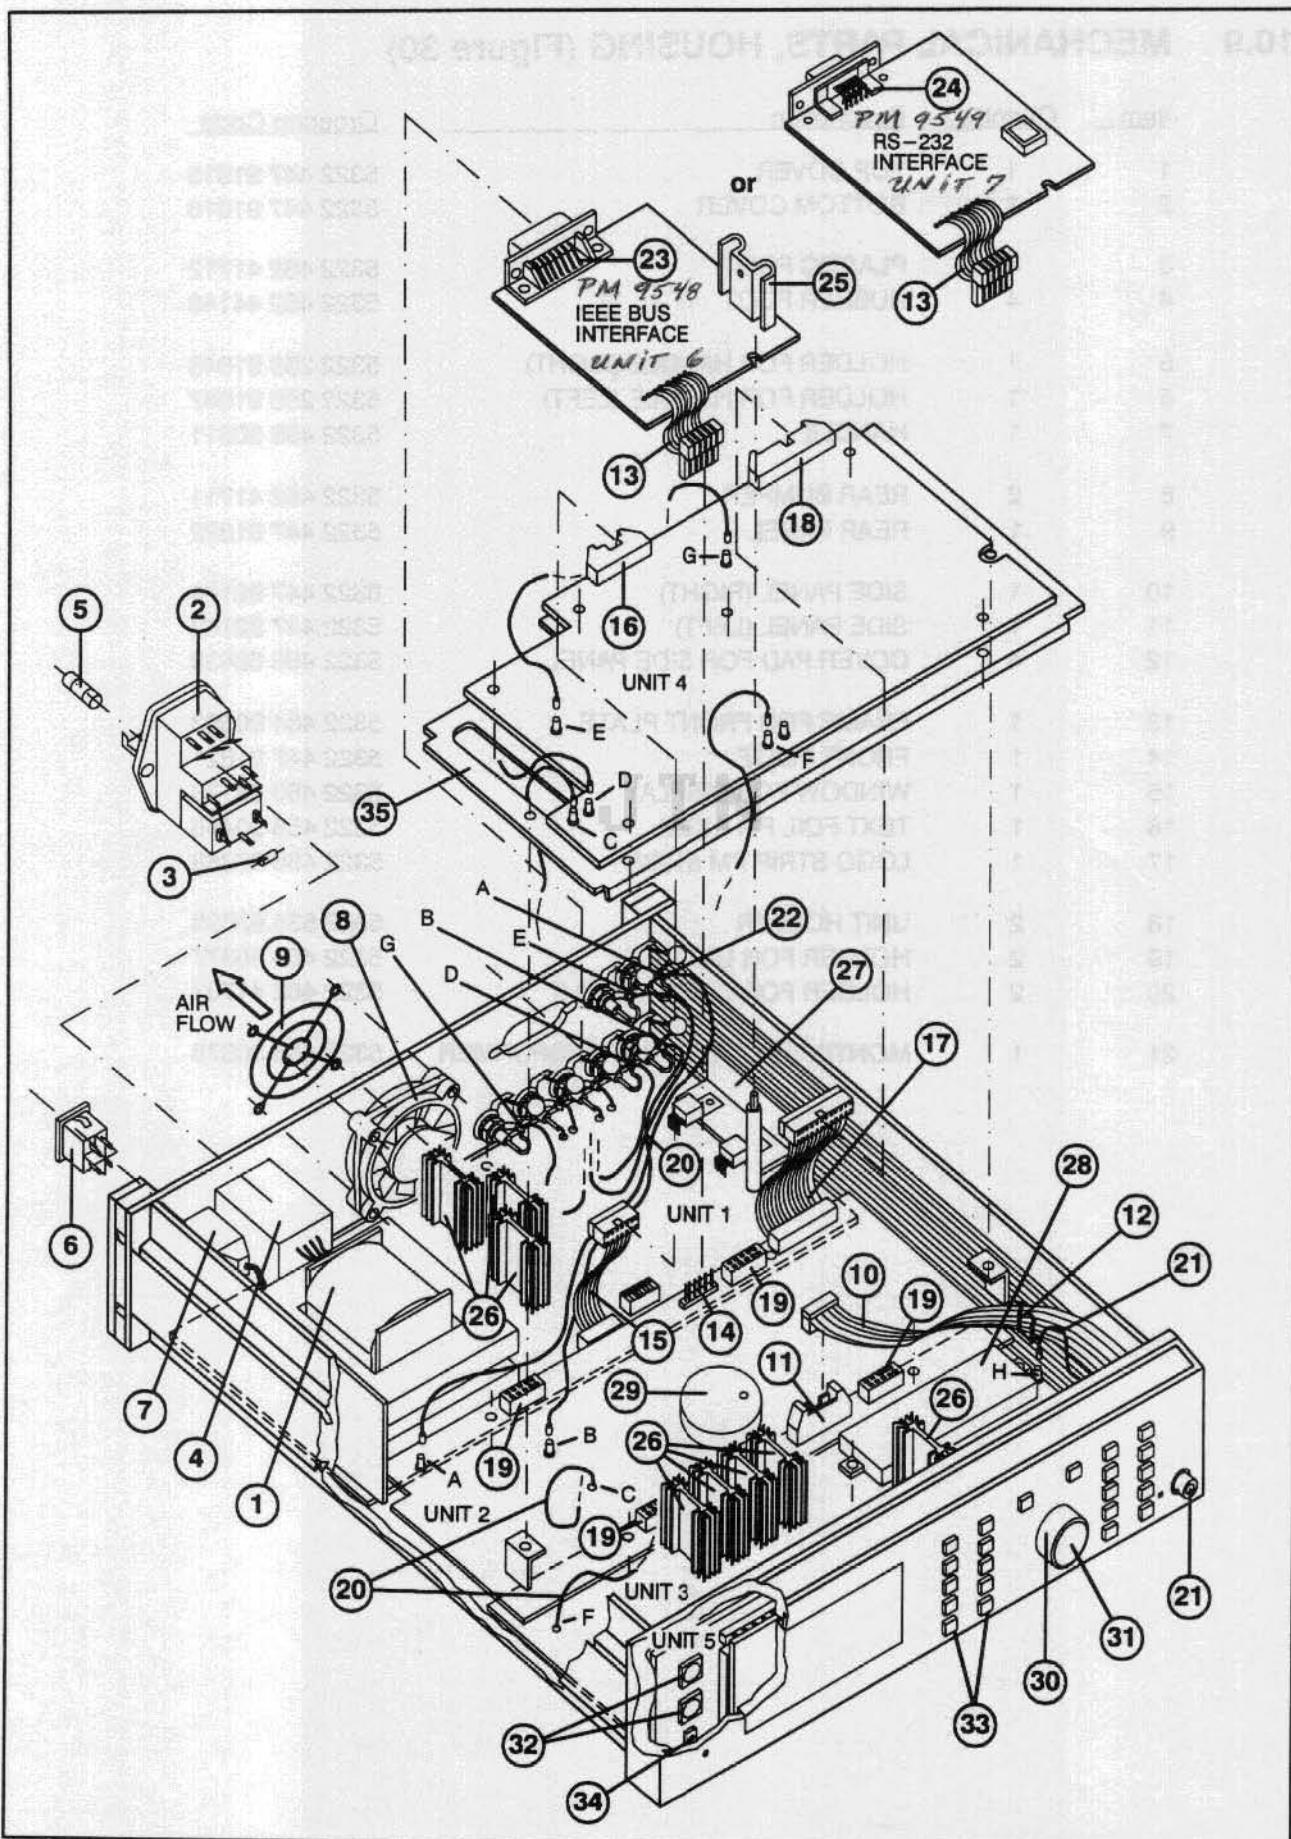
Mechanical Parts on Units, Cables, Miscellaneous
